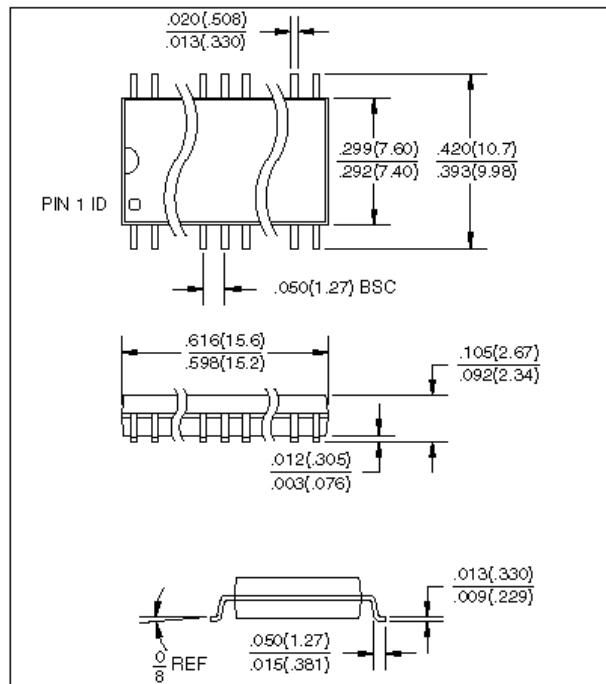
Package Drawing 24 Pin Small Outline Package (SO-24)
